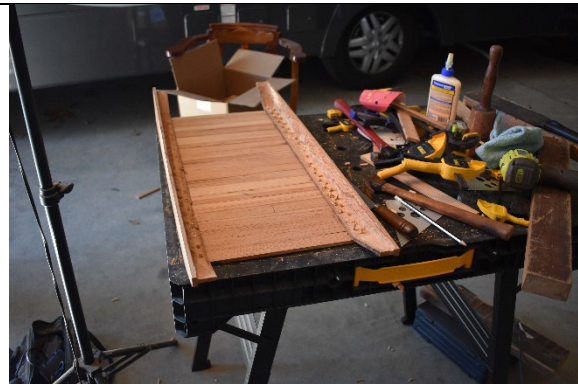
Chine-girder resting on its bottom, exterior planking for ramps not added (Photo by Michaela Hoots).
